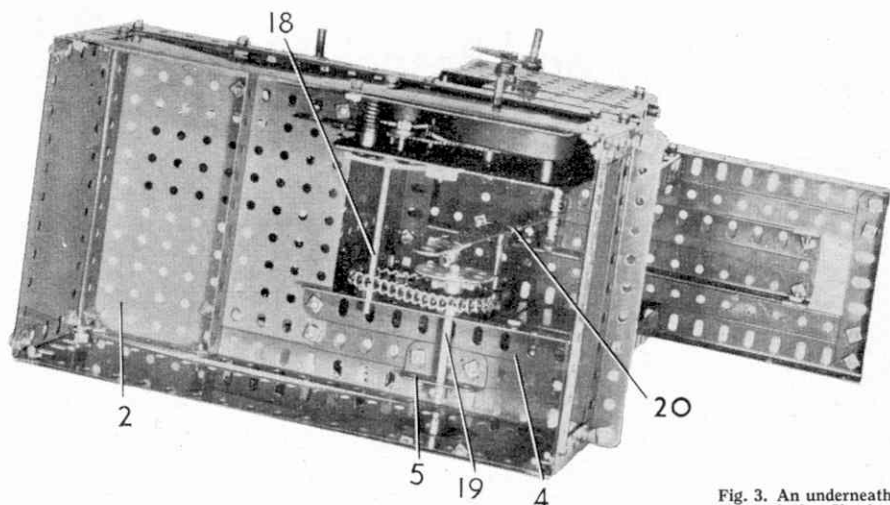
An underneath view of the Shaping Machine, showing how the Clockwork Motor is fitted.
